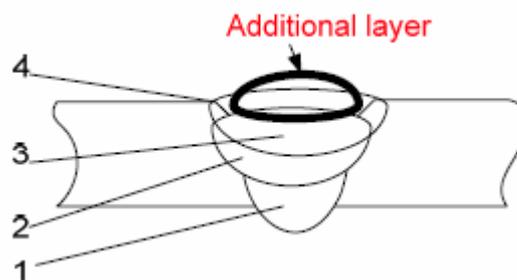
Application scheme of "Weld Toe Tempering Technique"
